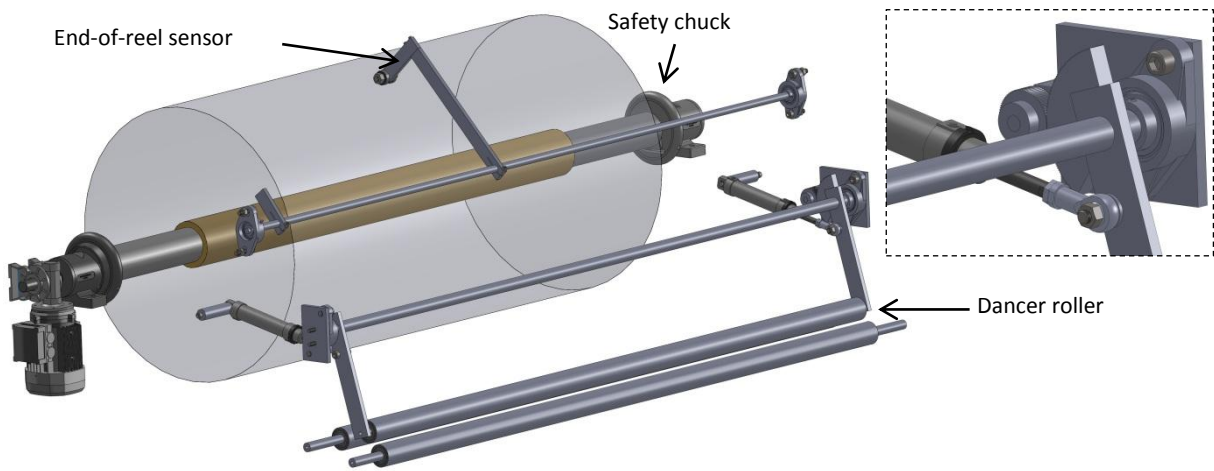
Tensioning system for the main reel (detail: geared sensor subsystem)
